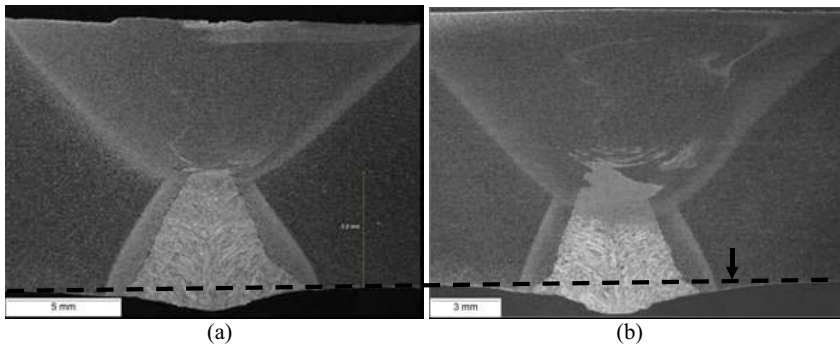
Cross-sections of the weld zone in a pipe weld illustrating 1) overlap of the arc and friction stir weld nuggets, 2) defect free welds in all weld nuggets, 3) penetration depth (5.2 mm) of the arc weld, and 4) no distortion on the weld inner diameter surface in (a) and very little in (b).
